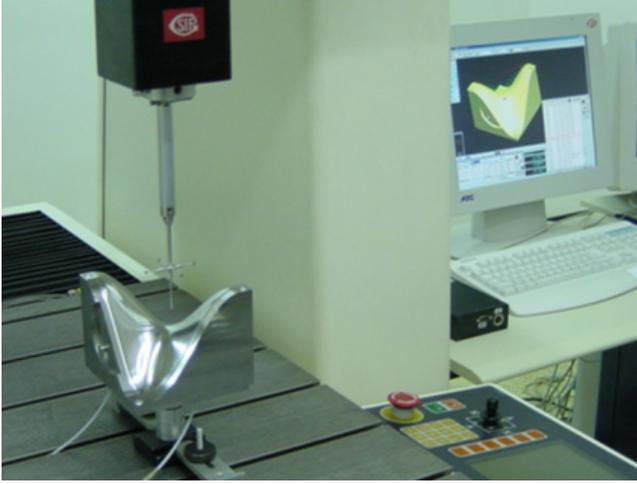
Measurement of PTB Double-sine standard on SIP CMM 5 machine.
